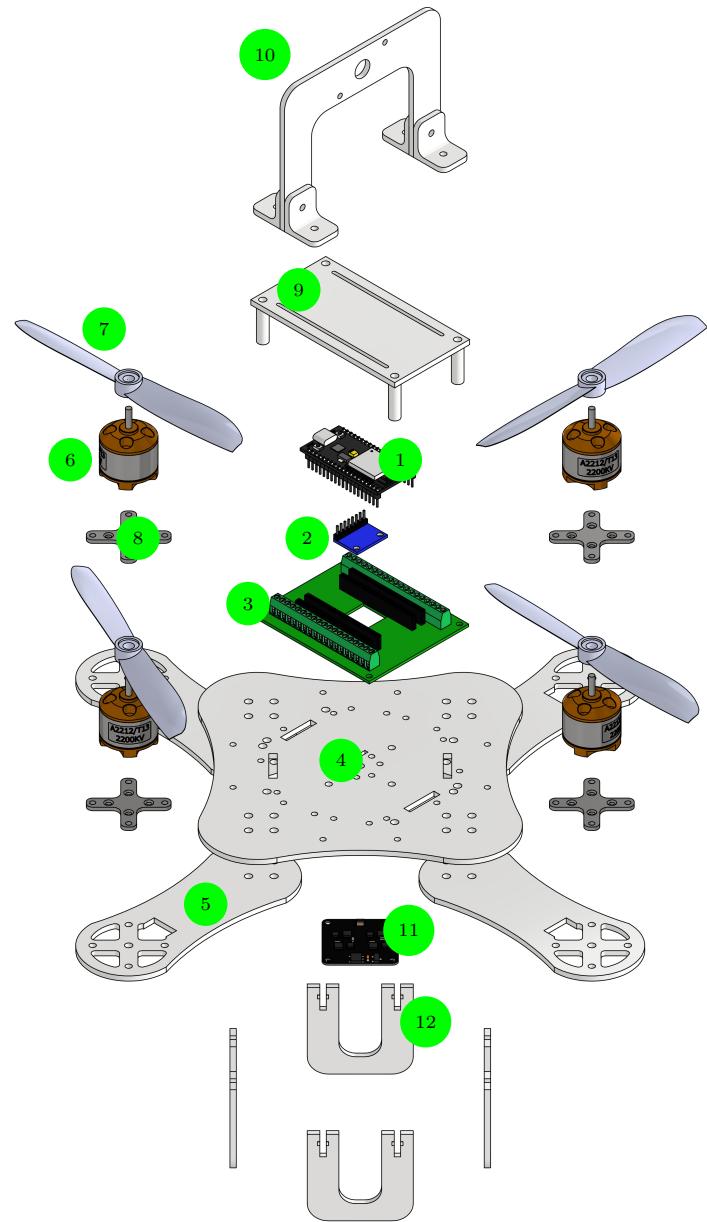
Exploded view of the quadcopter with numbered parts.
